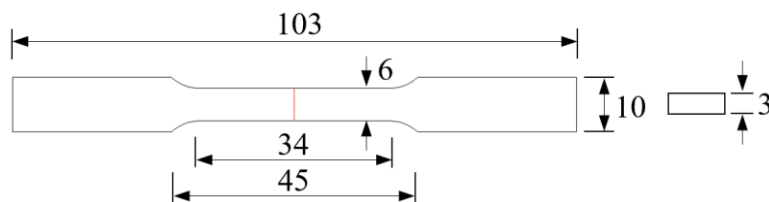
Dimensions of welded tensile coupons (dimensions in mm)
